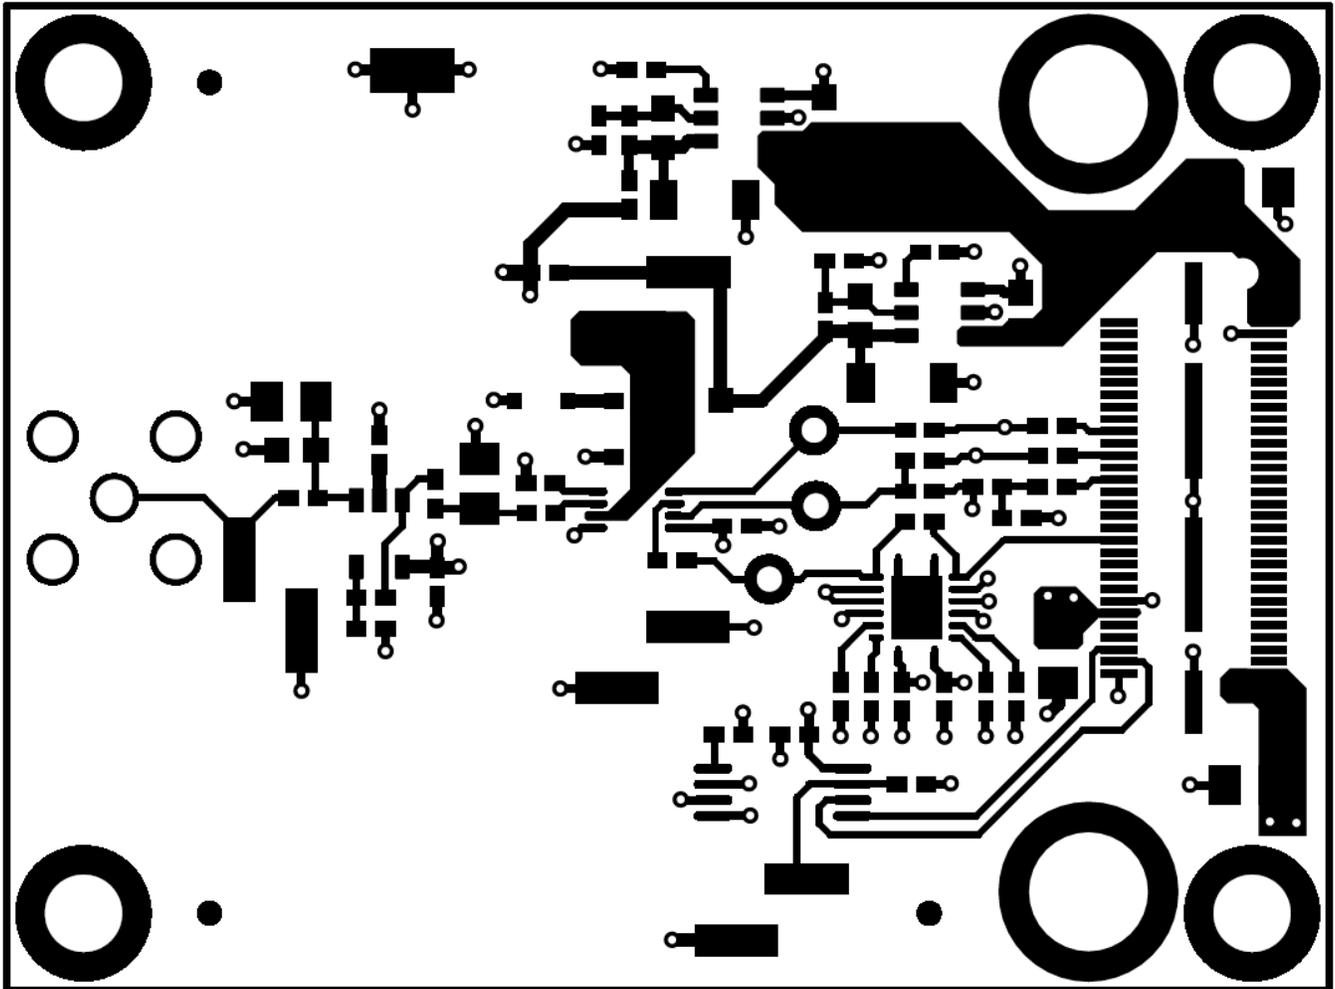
ADS7049-Q1EVM PCB Layer 1: Top Layer
